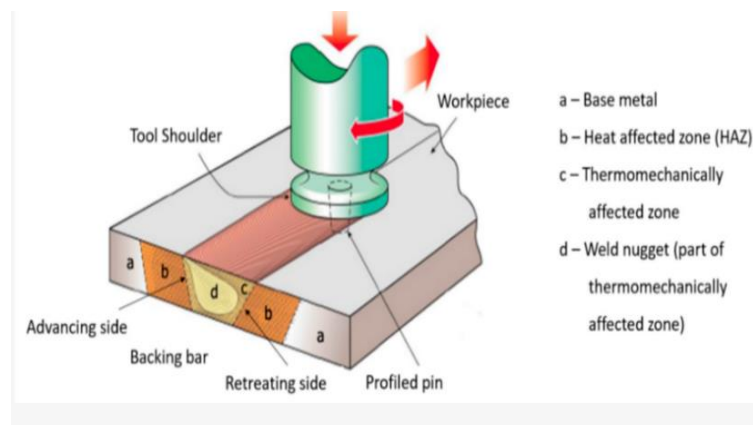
Schematic of the friction stir welding process [50]
